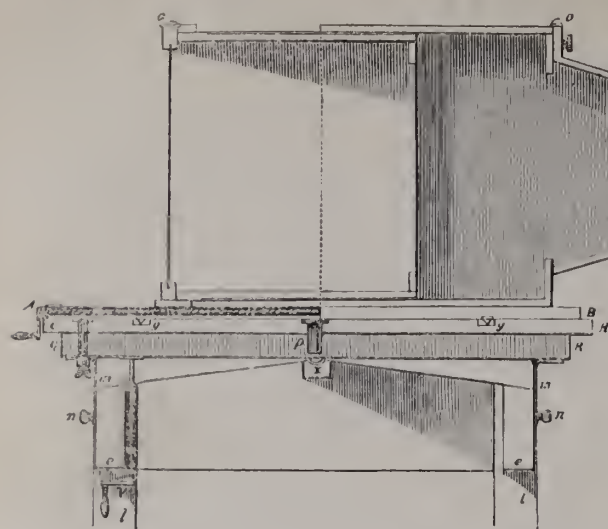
SECTION AND ELEVATION OF CAMERA AND STAND.
